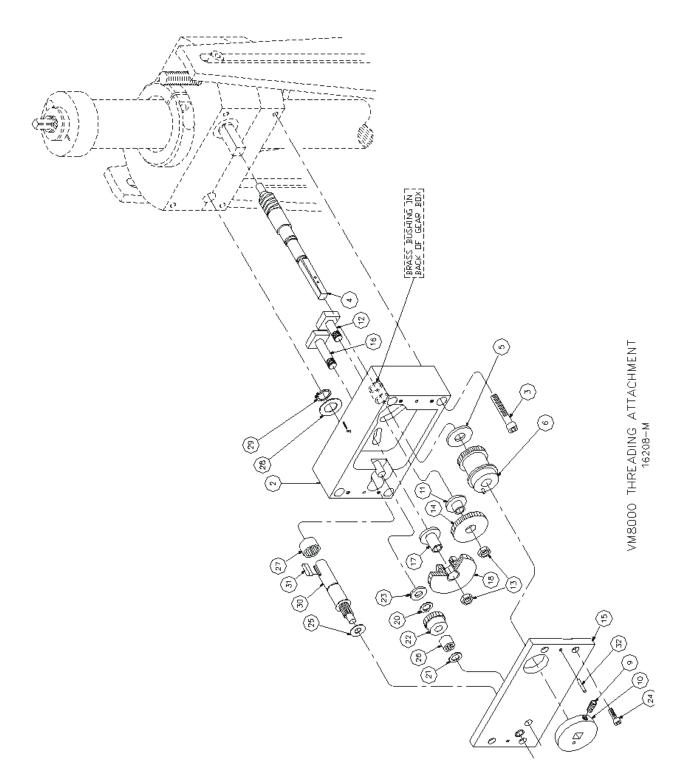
THREADING ATTACHMENT (P/N 16208)
